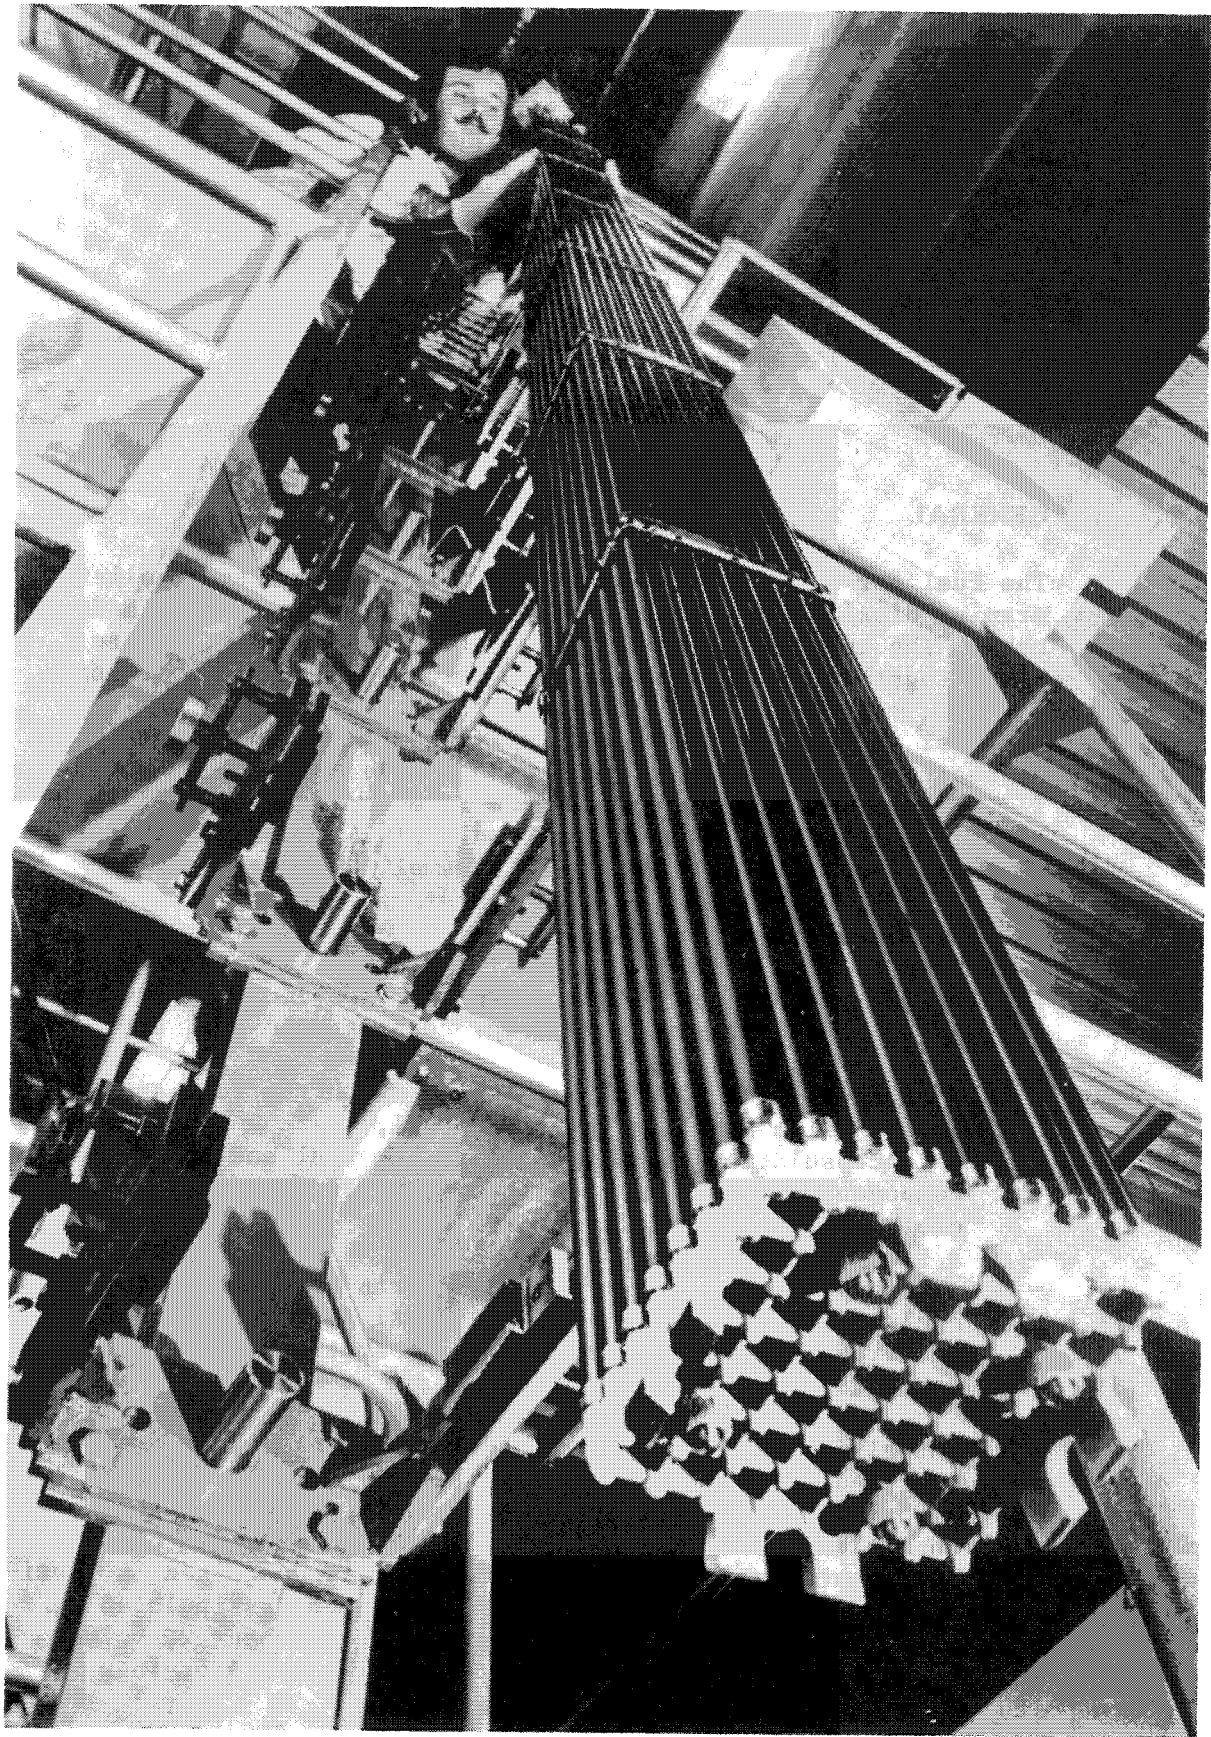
Fuel bundle for a BWR assembly. (Photo from ASEA-ATOM).
